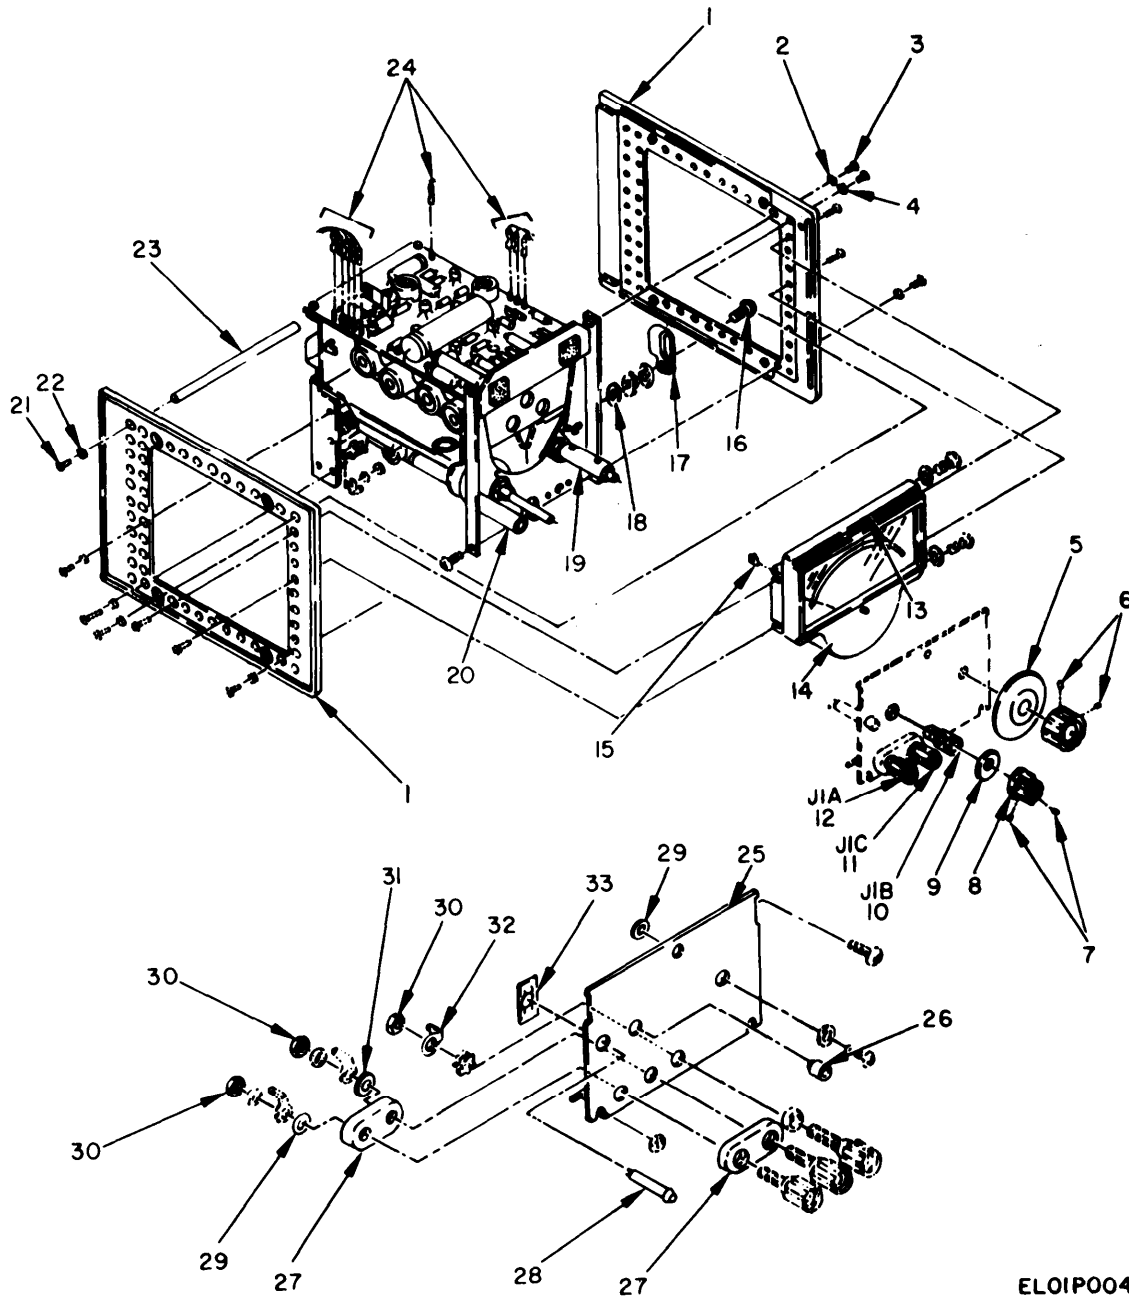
Voltmeter, Electronic ME-260/U or ME-260A/U A3, Front Panel Assembly.
